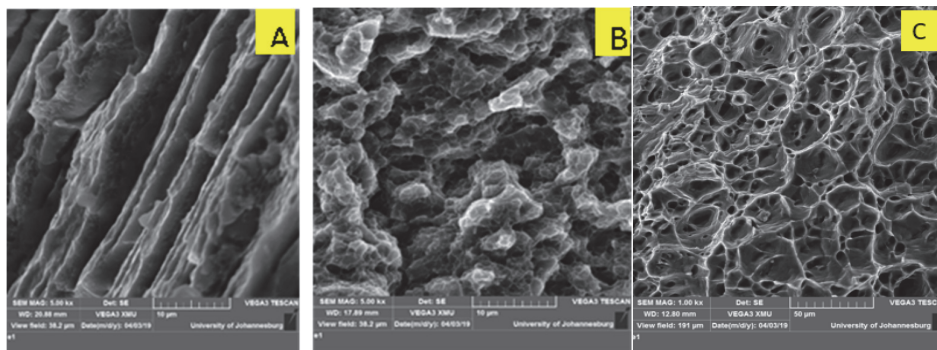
Fractography of the tensile tests fractured surfaces (a) AA7075-T651 (b) FSPed AA7075-T651 (c) AA7075-T651/17-4PH AMC
